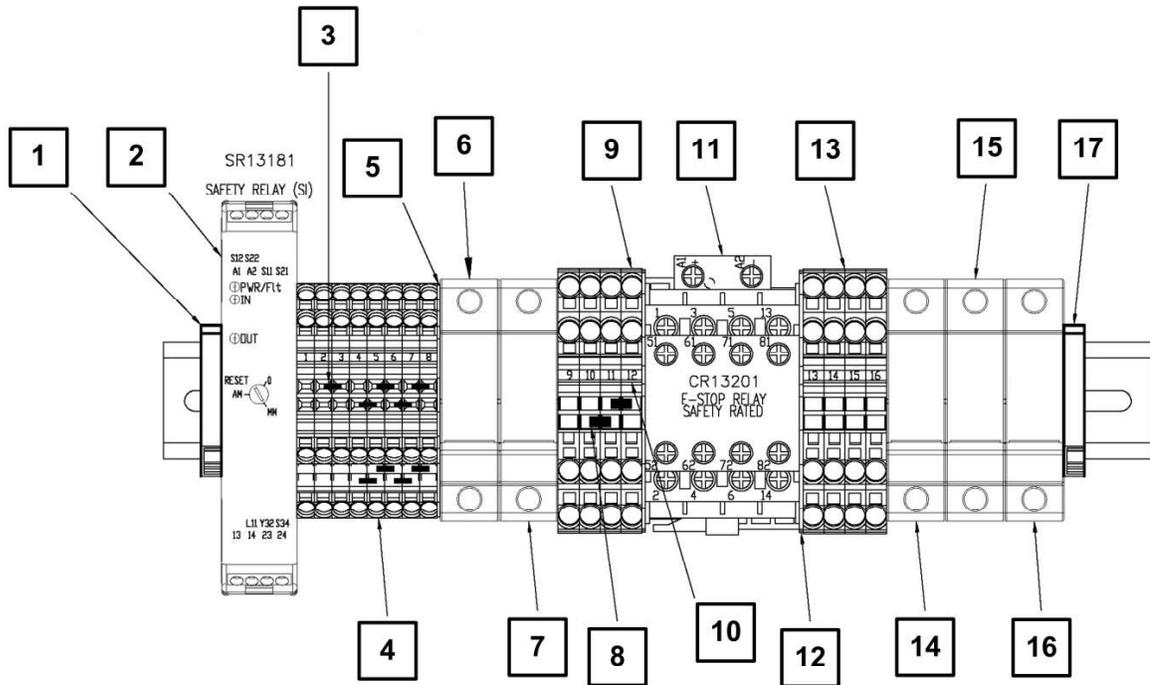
DIN RAIL ASSEMBLY-CE
